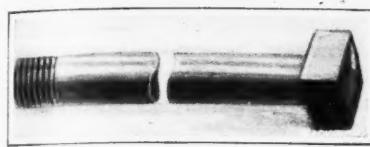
Type of Cap-screw made by Metzger Welding Process
